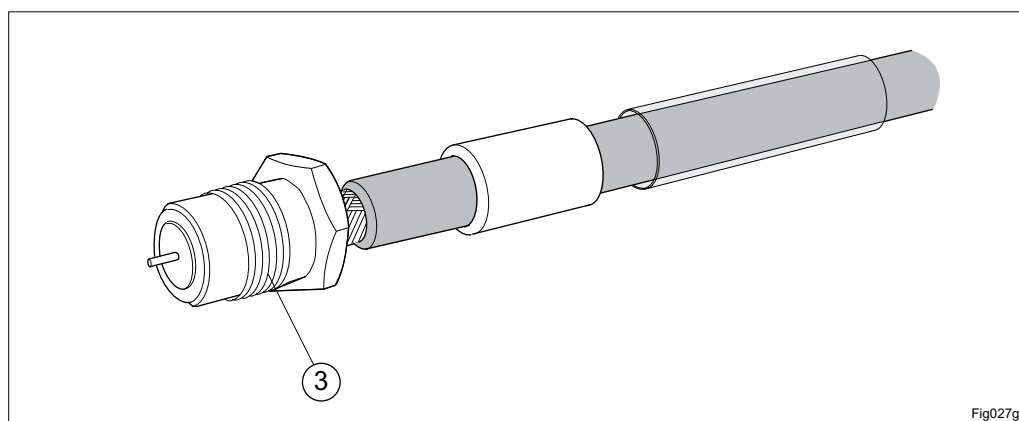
Inserting the trimmed cable into the rear end of the rear part connector.
